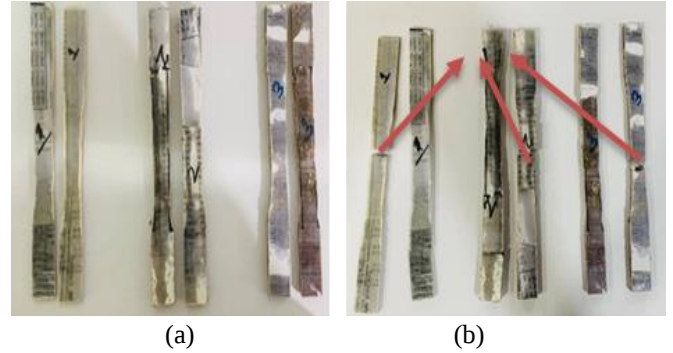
(a) Tensile test specimen, (b) Tensile test specimen after failure
